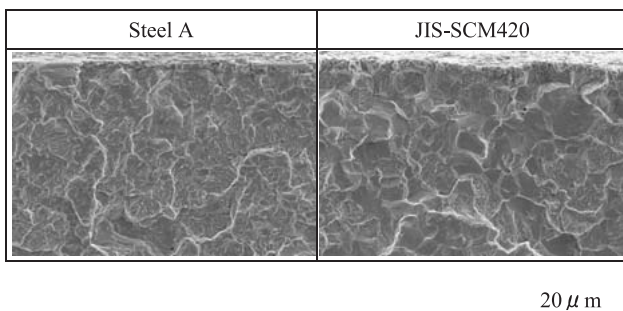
SEM images of fractured surface after four points bending fatigue test.
